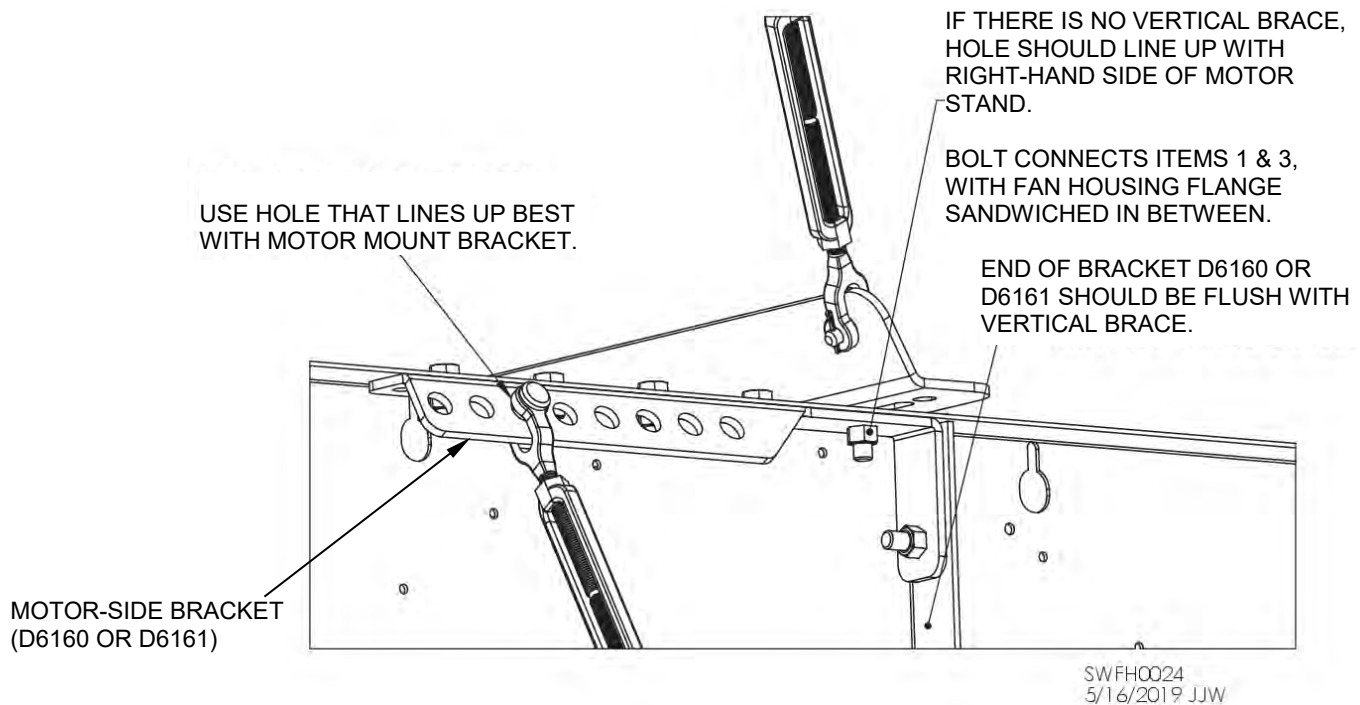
Positioning left (motor-side) bracket & motor mount turnbuckle
